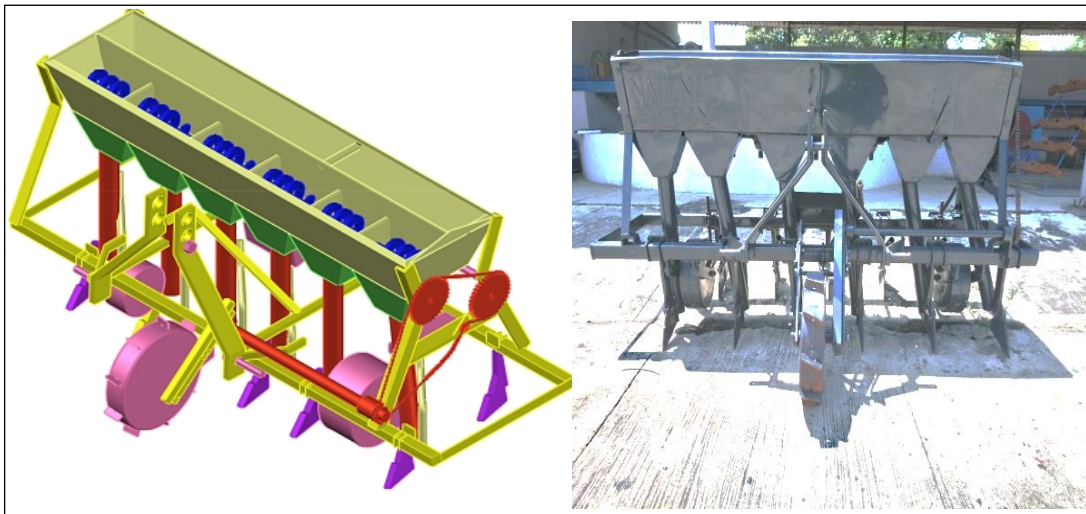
Isometric view of developed prototype subsurface manure applicator
